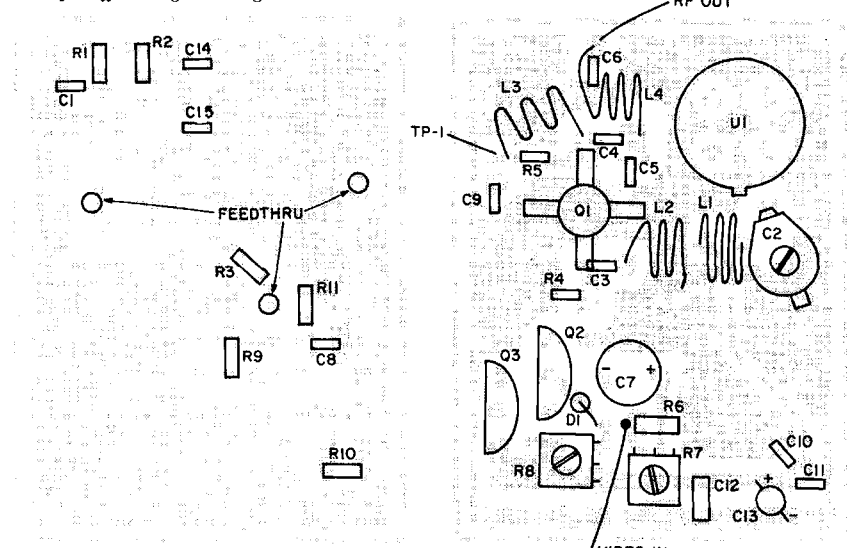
Parts placement: (a) Bottom side. (b) Top side.
